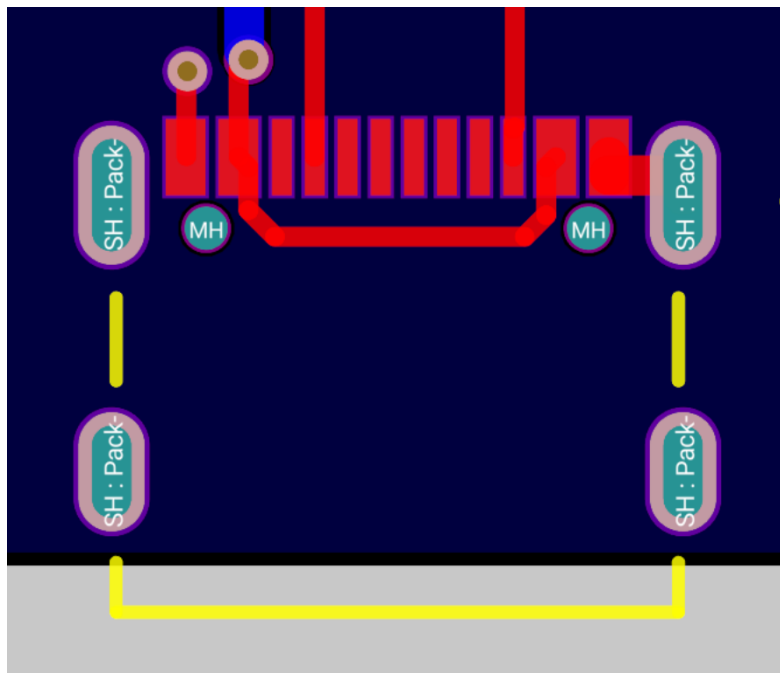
USB4105-GF-A-060 One Sided Surface Mounted USB Connector
